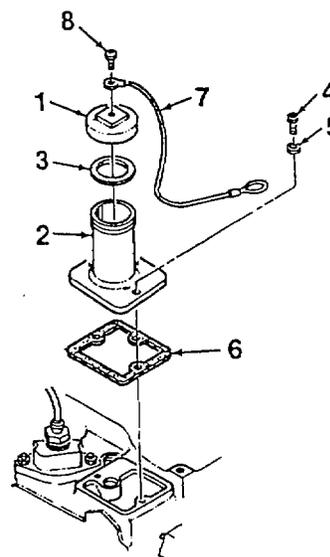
Oil Fill Tube (Sheet 1 of 2)
